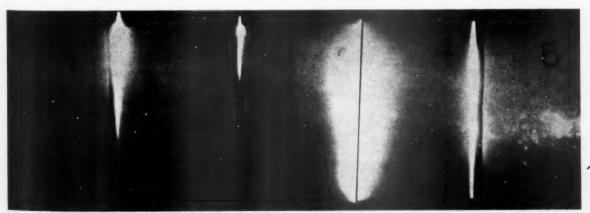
Welding samples made by five different welders to determine the best welder for a difficult welding job. Nos. 3 and 4 are good welds while the other three show porosity and poor fusion.
